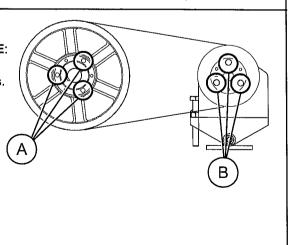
Drive Sheave (Pulley) Alignment Tolerance Check Measurement Points
